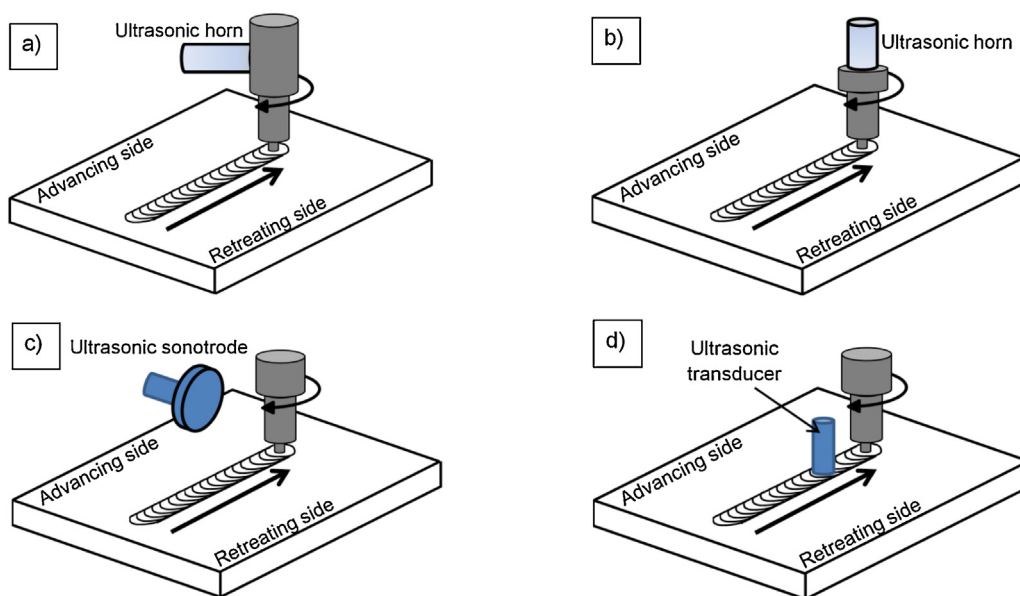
Diagrams of ultrasonic assisted FSP/FSW techniques where ultrasonic energy is transmitted (a) onto workpiece from horn a through FSW tool via bearing, (b) through tool, (c) directly on far end of one of the workpieces, and (d) directly into stir zone.
